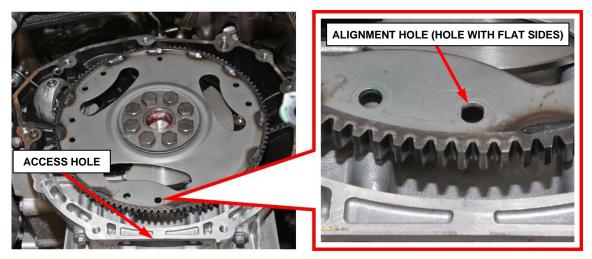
Position the Flex Plate Alignment Hole to the Access Hole
